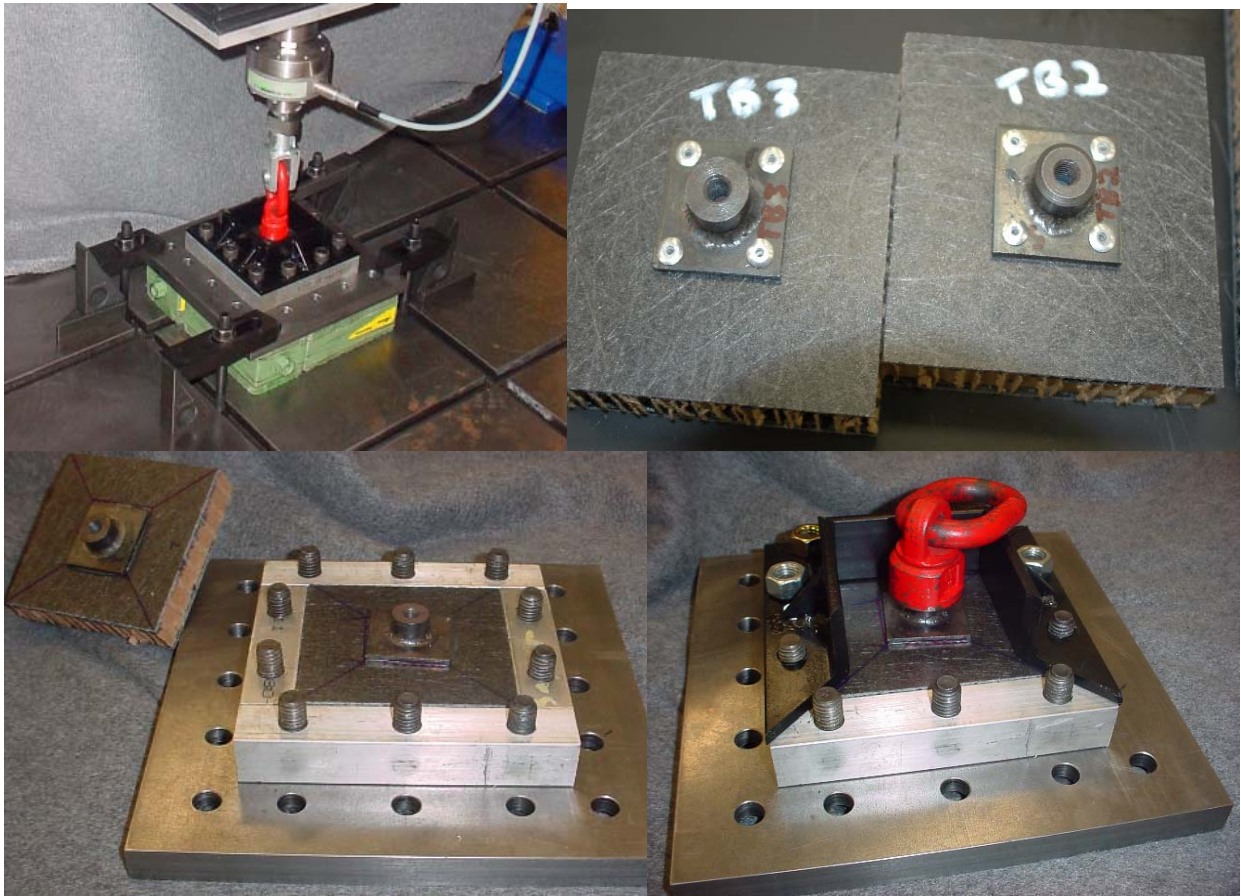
From left top corner, clockwise: pull out test setup, specimen with riveted metallic insert, holding fixture with adhesively bonded specimens, fixture with edge angles to hold specimen.
